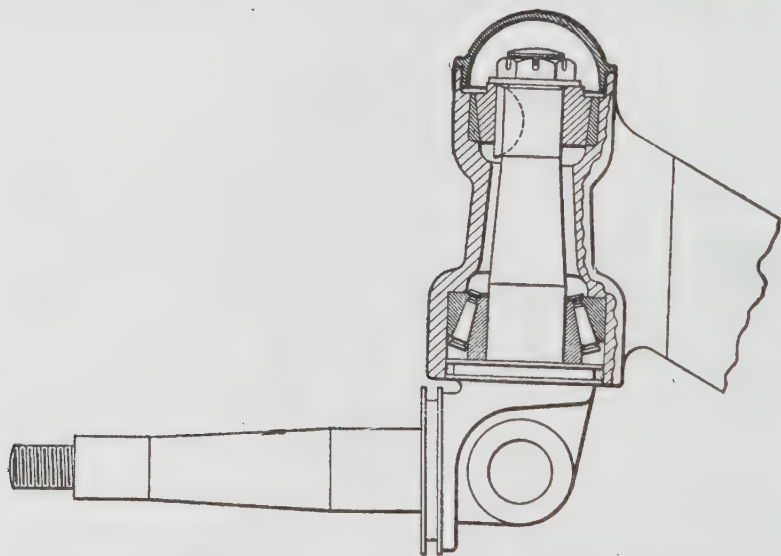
LEMOINE TYPE OF STEERING HEAD (WINTON).
